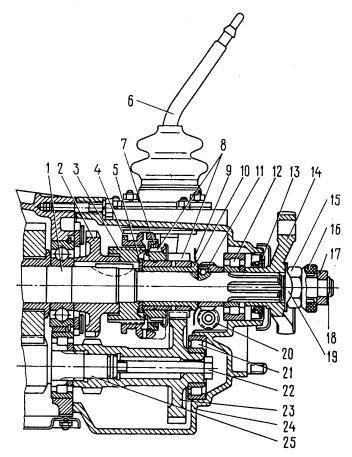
Rear Part of Five-Speed Gearbox:
